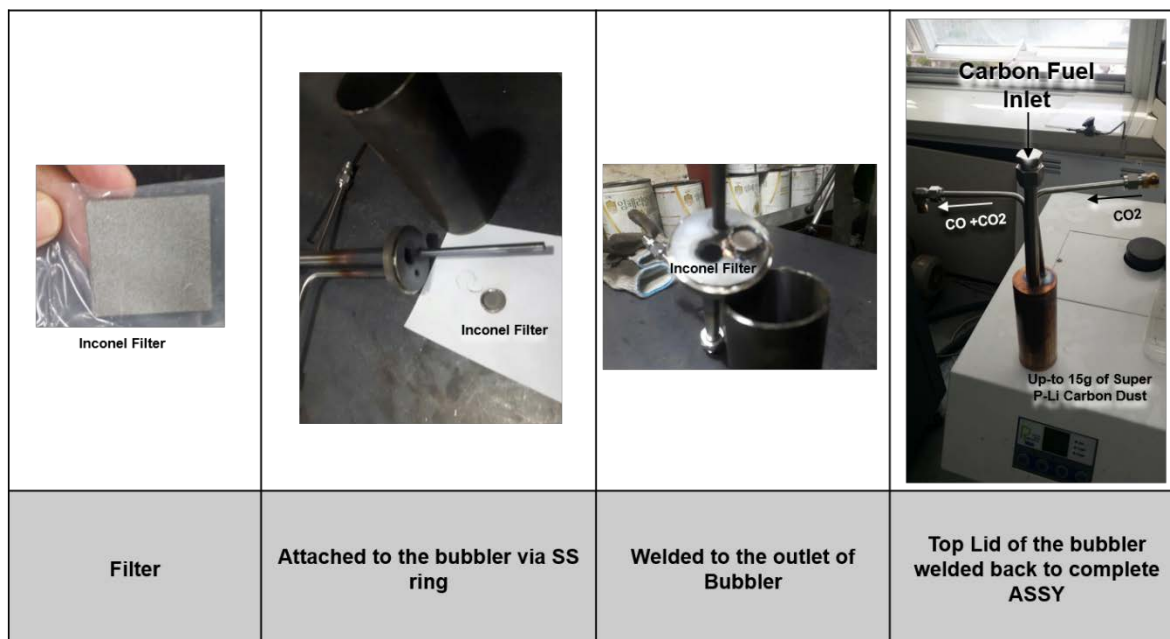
Inconel Filter and its attachment on the bubbler assembly
